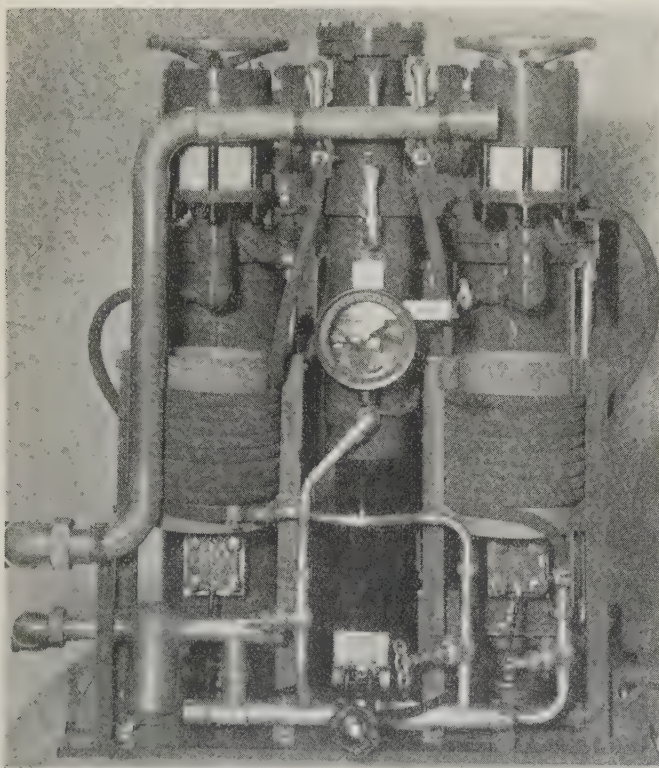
Assembly of the ignitron power tubes of the seam welding timer
